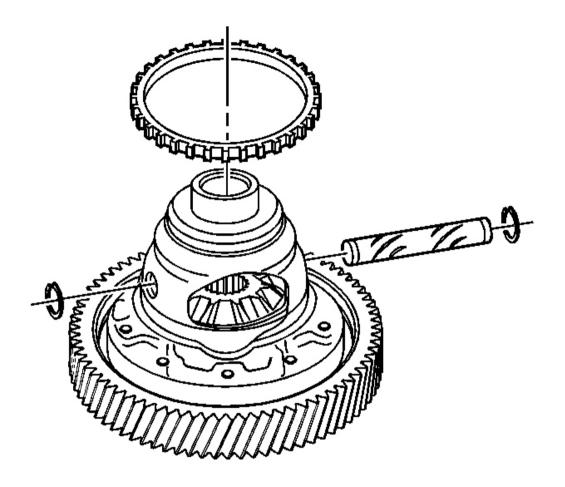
Differential Pinion Shaft & Retaining Rings Courtesy of GENERAL MOTORS CORP.
